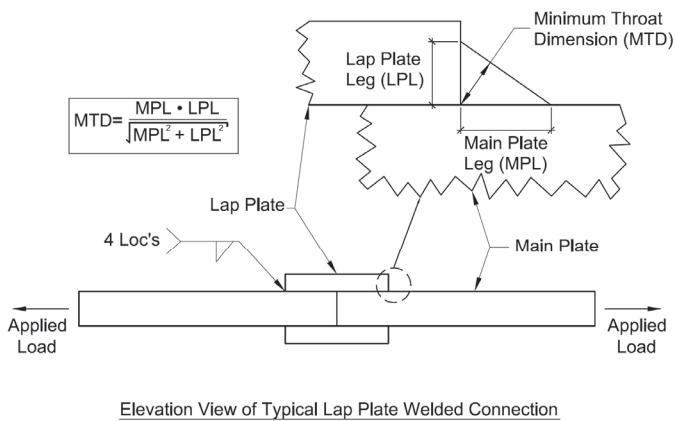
Fillet weld leg size measurement definitions.
